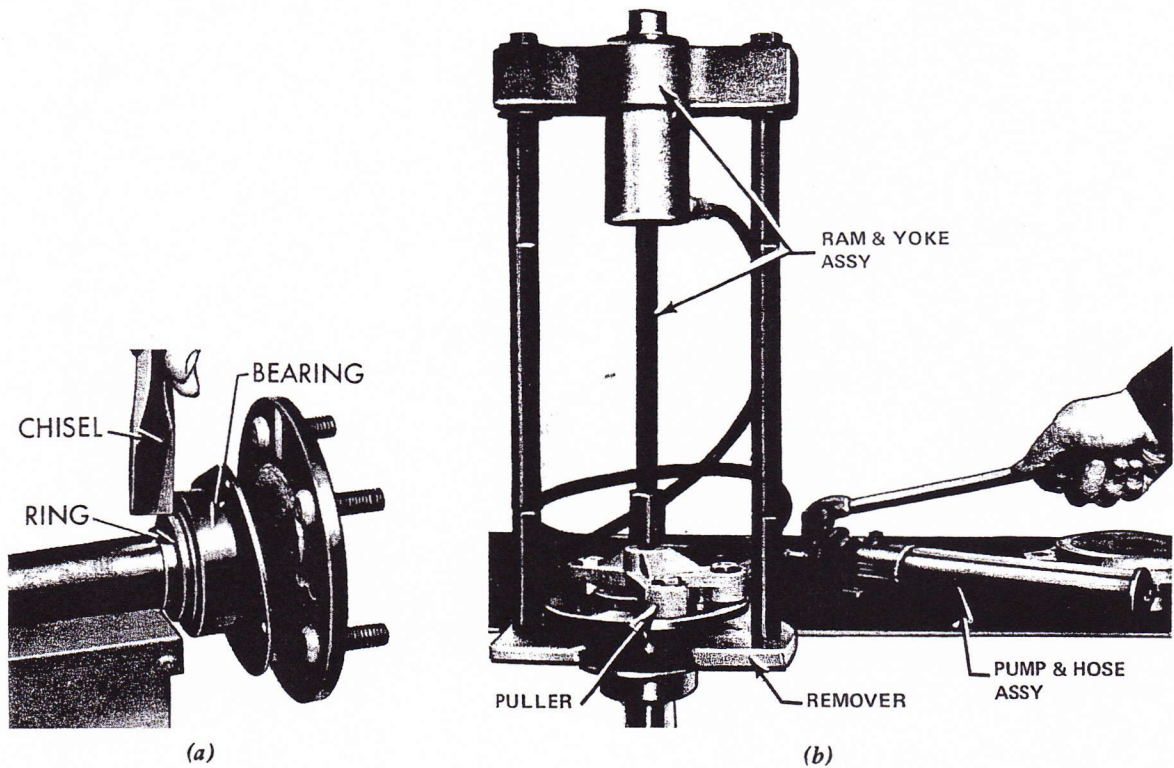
Removing Lock and Bearing from Axle. (a) Using a cold chisel to notch the retaining ring; (b) removing the rear axle bearing.
